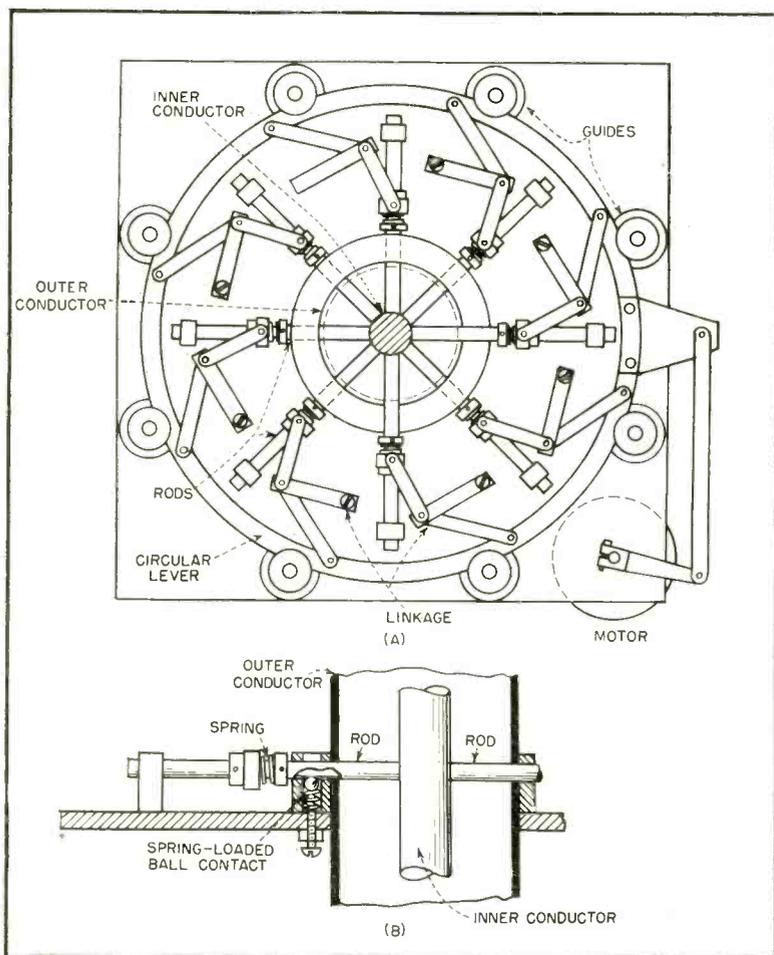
Coaxial switch (A) uses circular lever to operate eight contacting rods simultaneously. Vertical cross-section (B) shows use of spring-loaded ball as rod electrical contact
